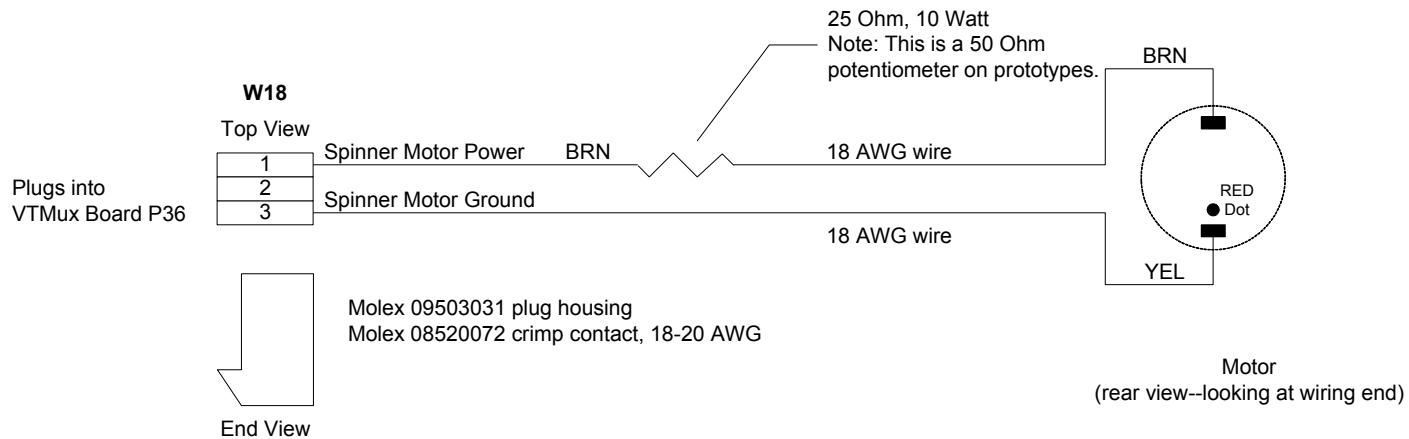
VTMUX BOARD P34 TO SPINNER MOTOR
